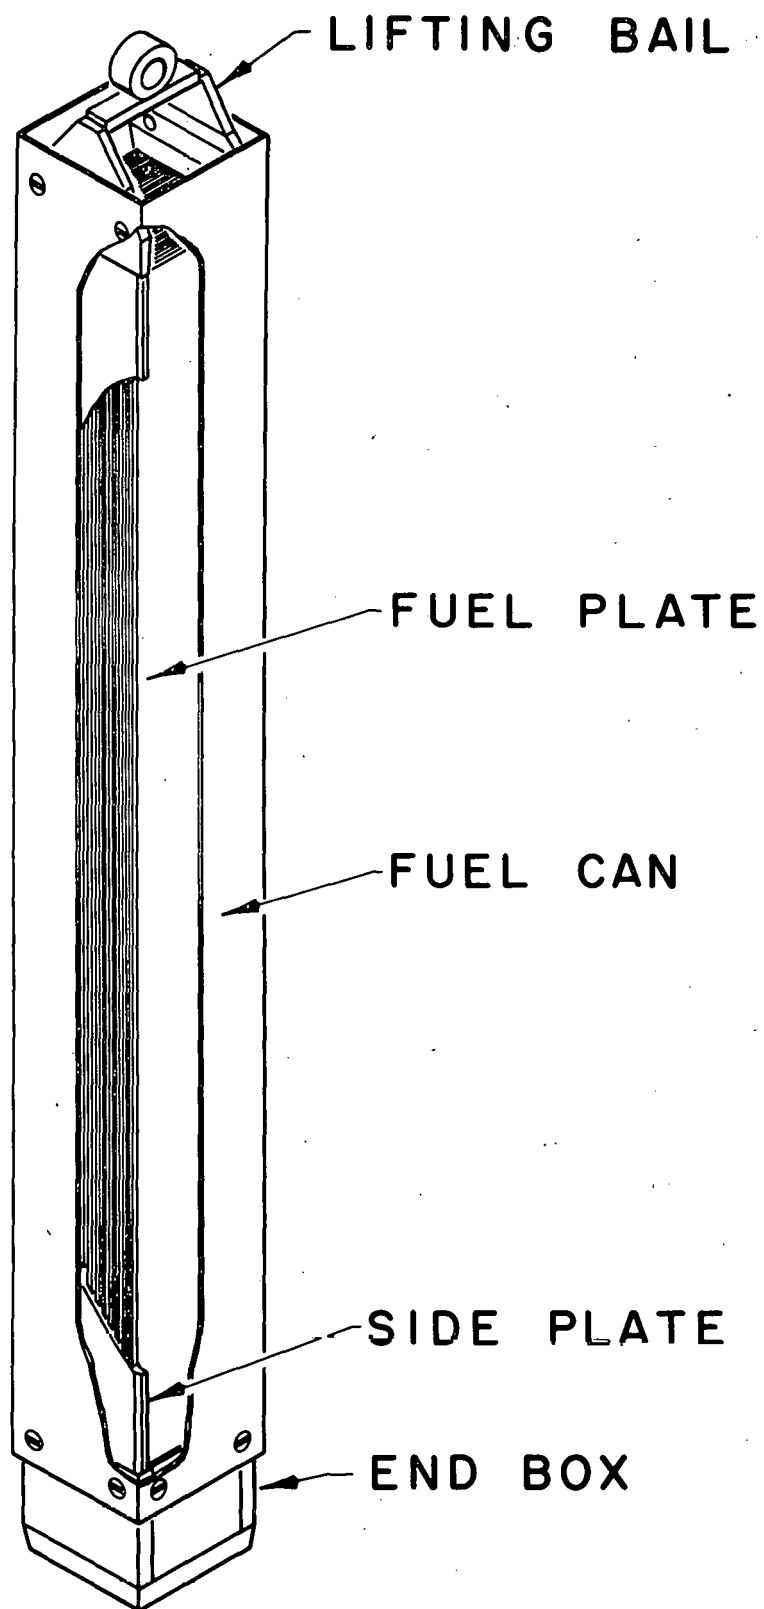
Standard Spert Type-D 12-Plate Fuel Assembly
